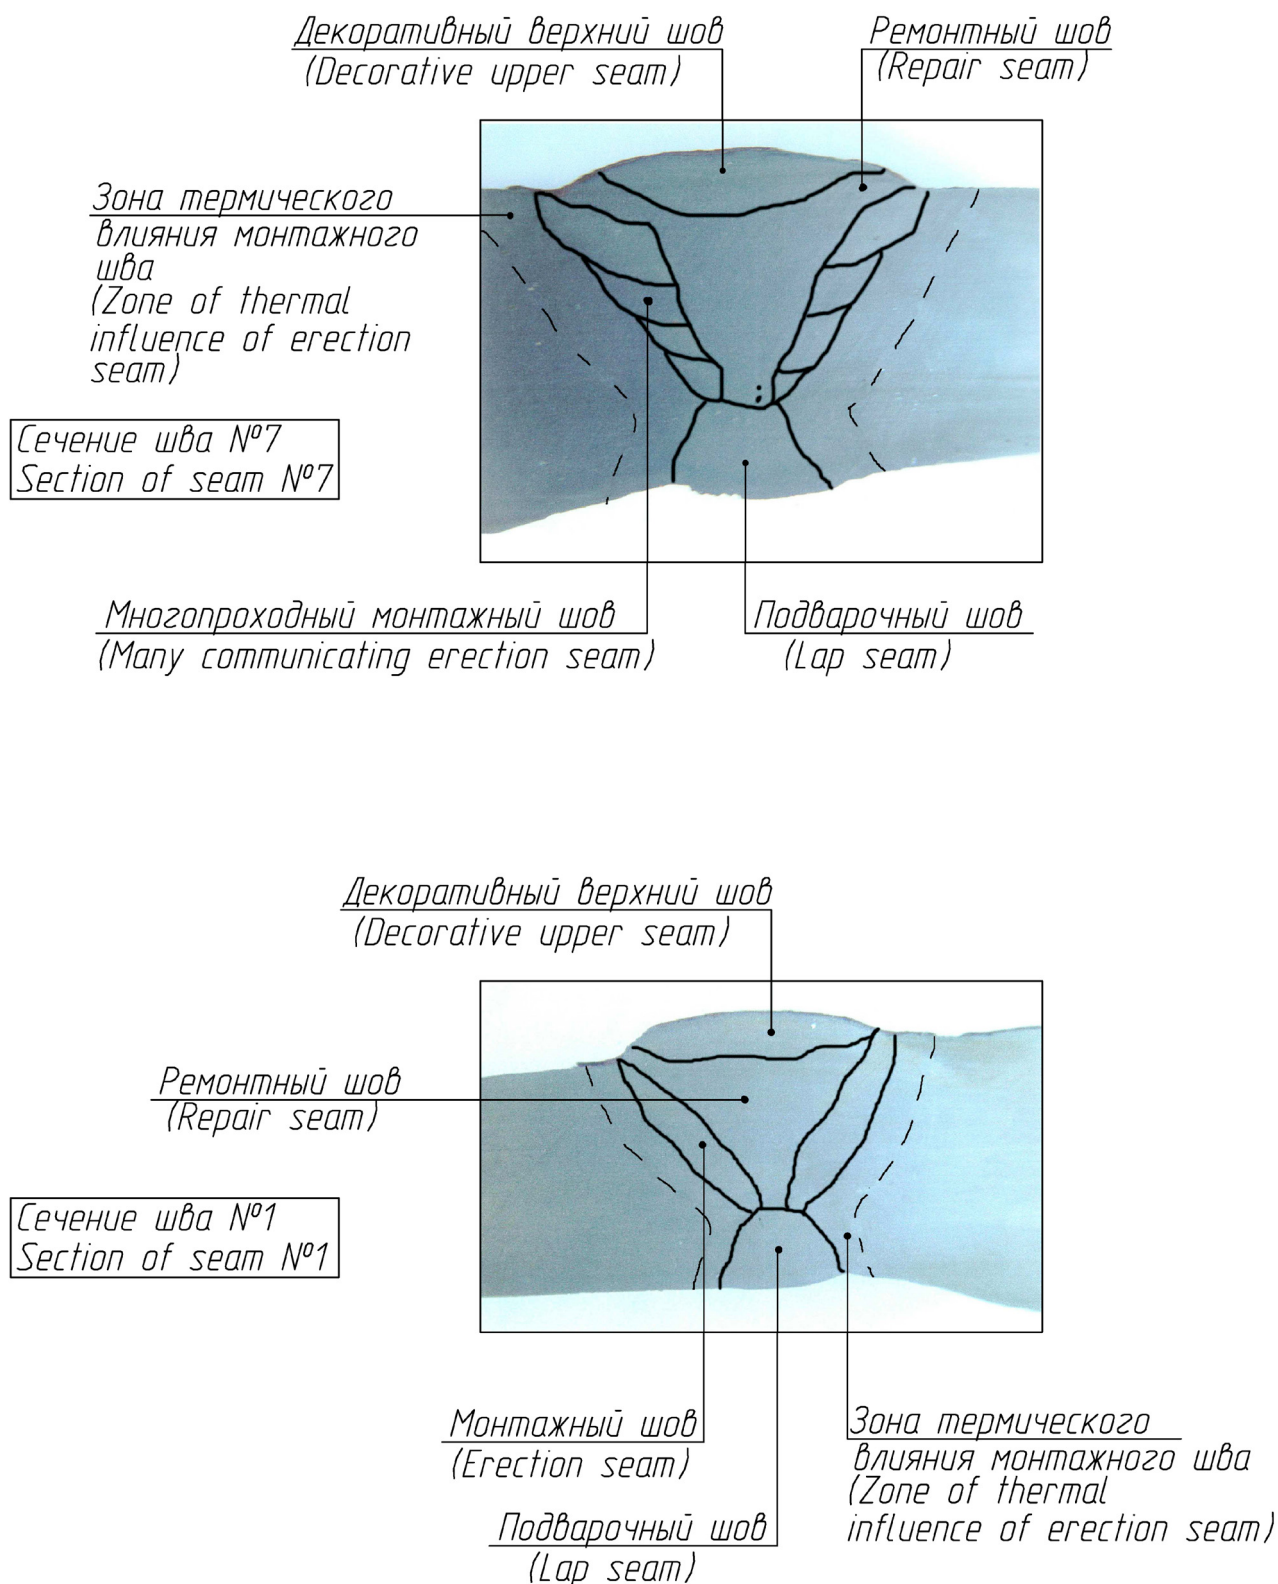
Transverse polishers of welding seams № 7 and № 1 crane-loader
